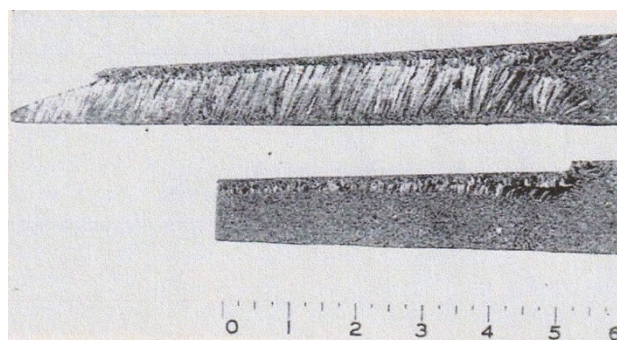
Bottom chilled commercial purity (99.85%) aluminum castings, etched longitudinal section. In the upper casting, metal spilled out the left end during pour. In the lower casting, the end was plugged.
